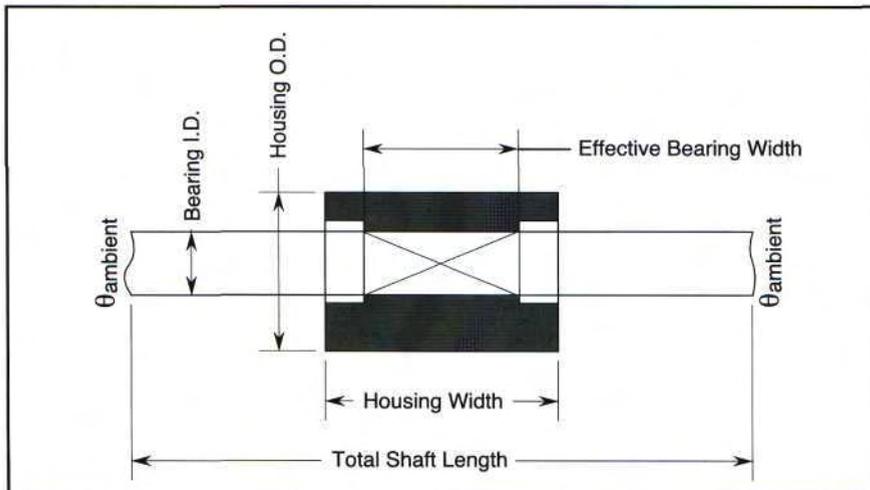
Definition of Bearing Dimensions for the Heat Transfer Model.
